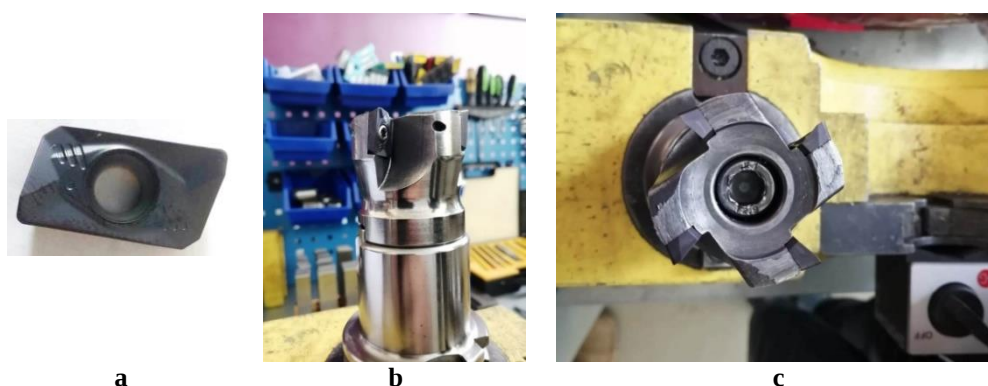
The cutting tool used in steel milling: a – carbide indexable insert, b and c – general view of the end mill with installed carbide indexable inserts.
